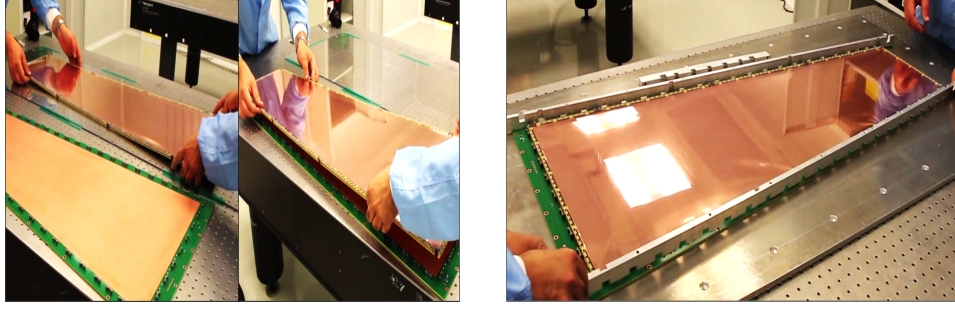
(left) Placing the GEM stack onto the drift board. (right) The GEM stack on the drift board and fixation of the drift board with the assembly jig [17].
